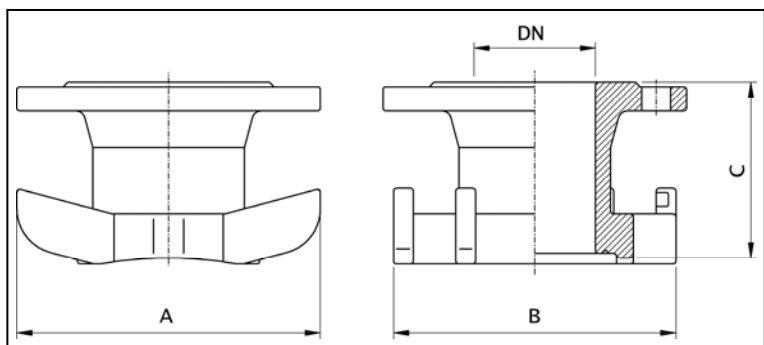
Double saddle clamp-drill-clamp with flange pipe size 3" DN 80 PN 4 / 58.0 psig (gas) / PN 16 / 232.1 psig (water)
